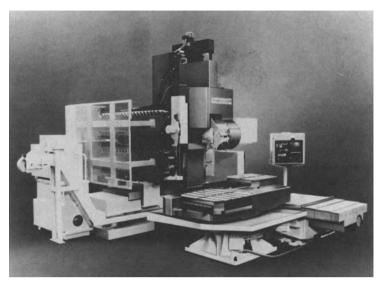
A large 5-axis twin-pallet machining centre. [Courtesy of Cincinnati Milacron.]
